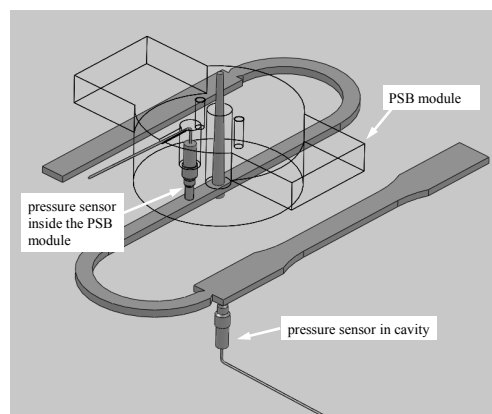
Schematic drawing of arrangement of the pressure sensor inside the PSB module and the mold
